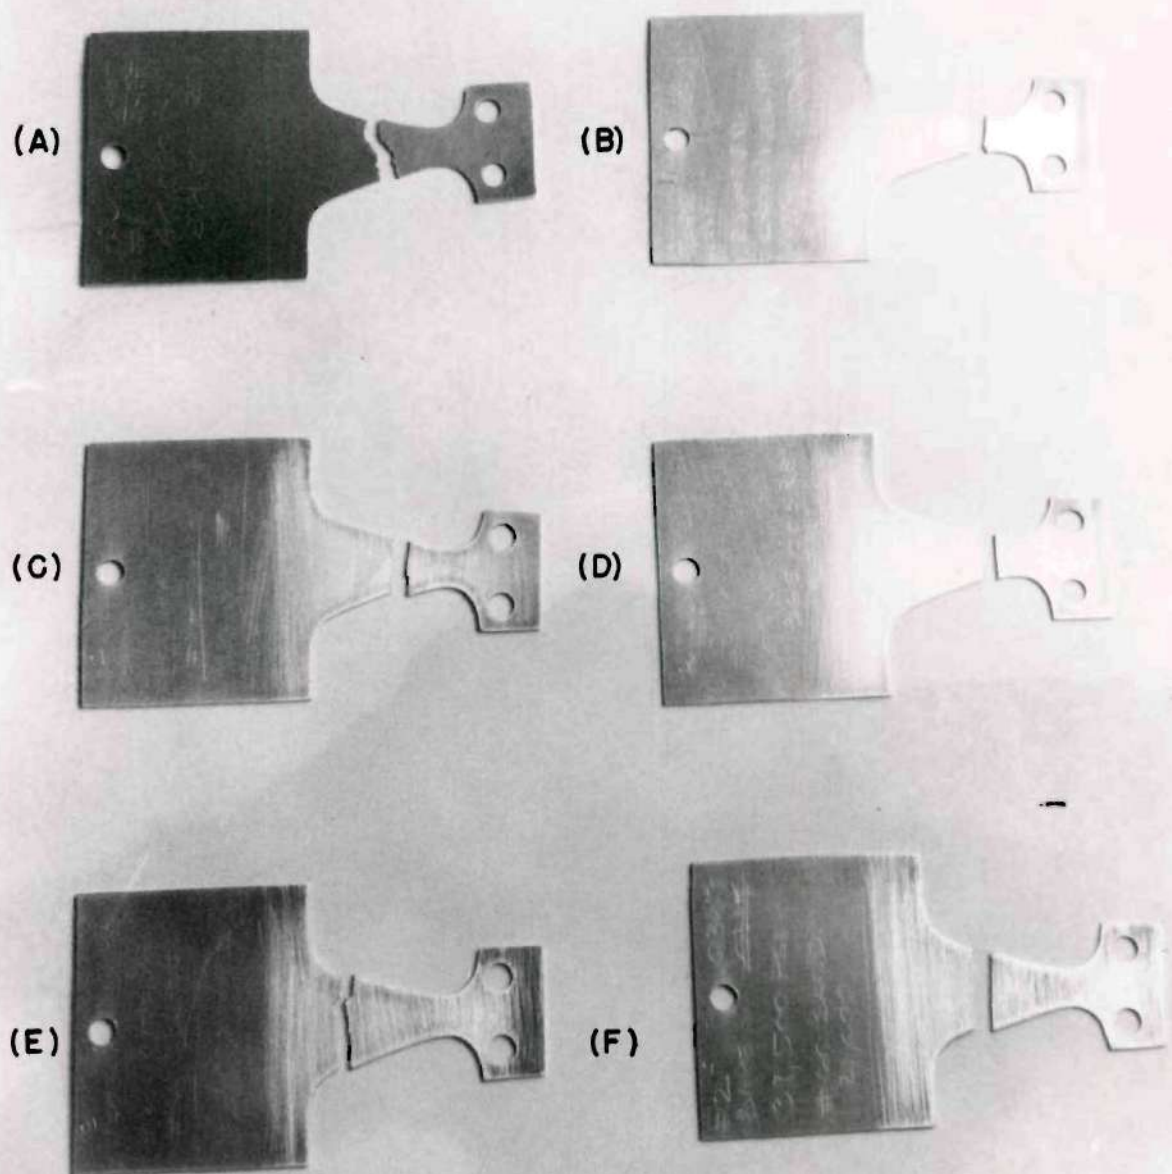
FRACTURED 24 S-T SPECIMENS
